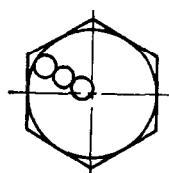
BOLTS WITH CLOSE TOLERANCE SHANKS
